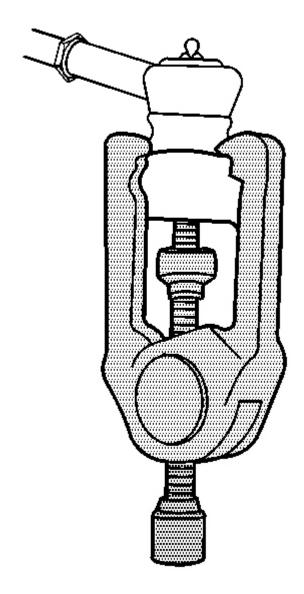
Removing Outer Tie Rod Assembly From Steering Knuckle Courtesy of GENERAL MOTORS CORP.
